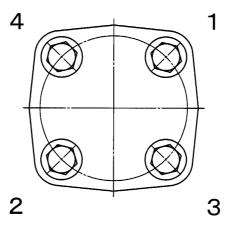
Examples for the Sequence of Bonnet Bolts Tightening
